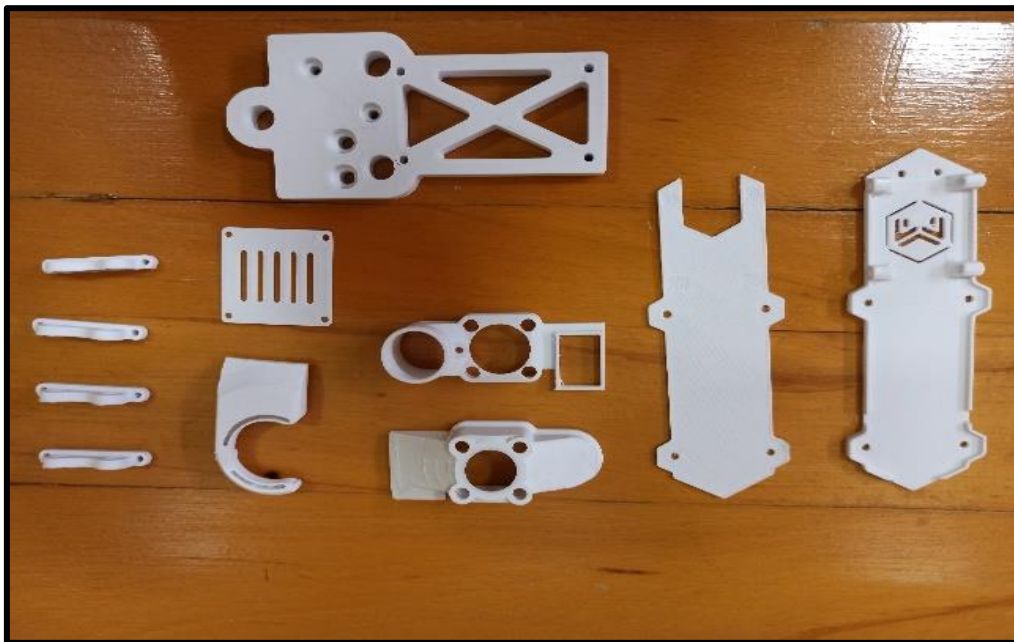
Pellet extrusion system parts printed on a three-dimensional printer
